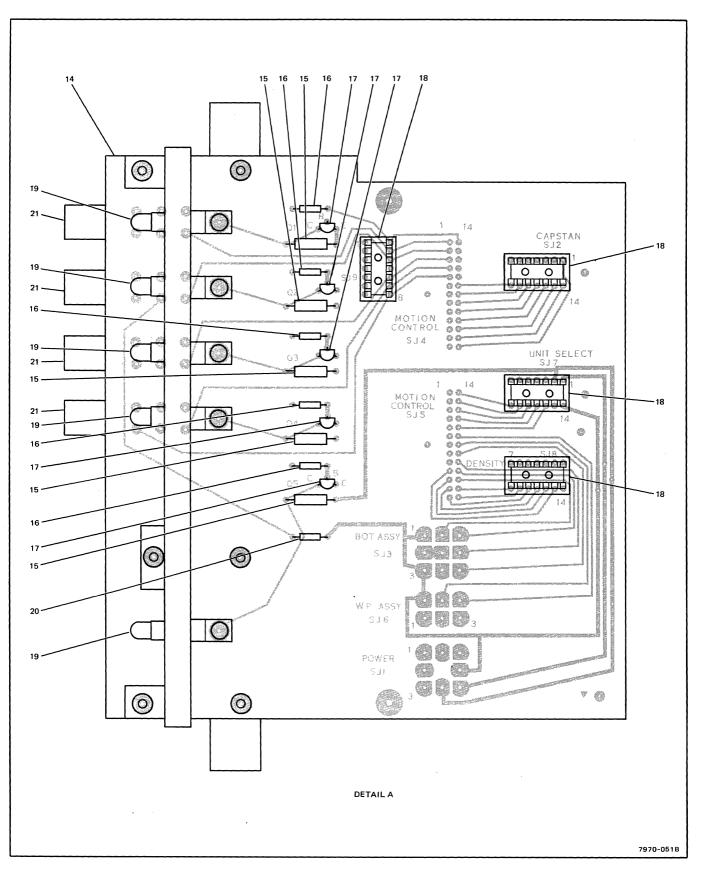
Control Switch Assembly A11 (Sheet 2 of 2)
